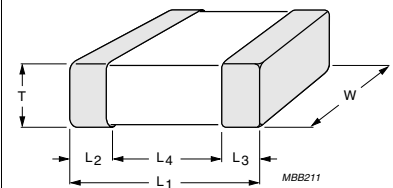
Surface mounted multilayer ceramic capacitor dimension
